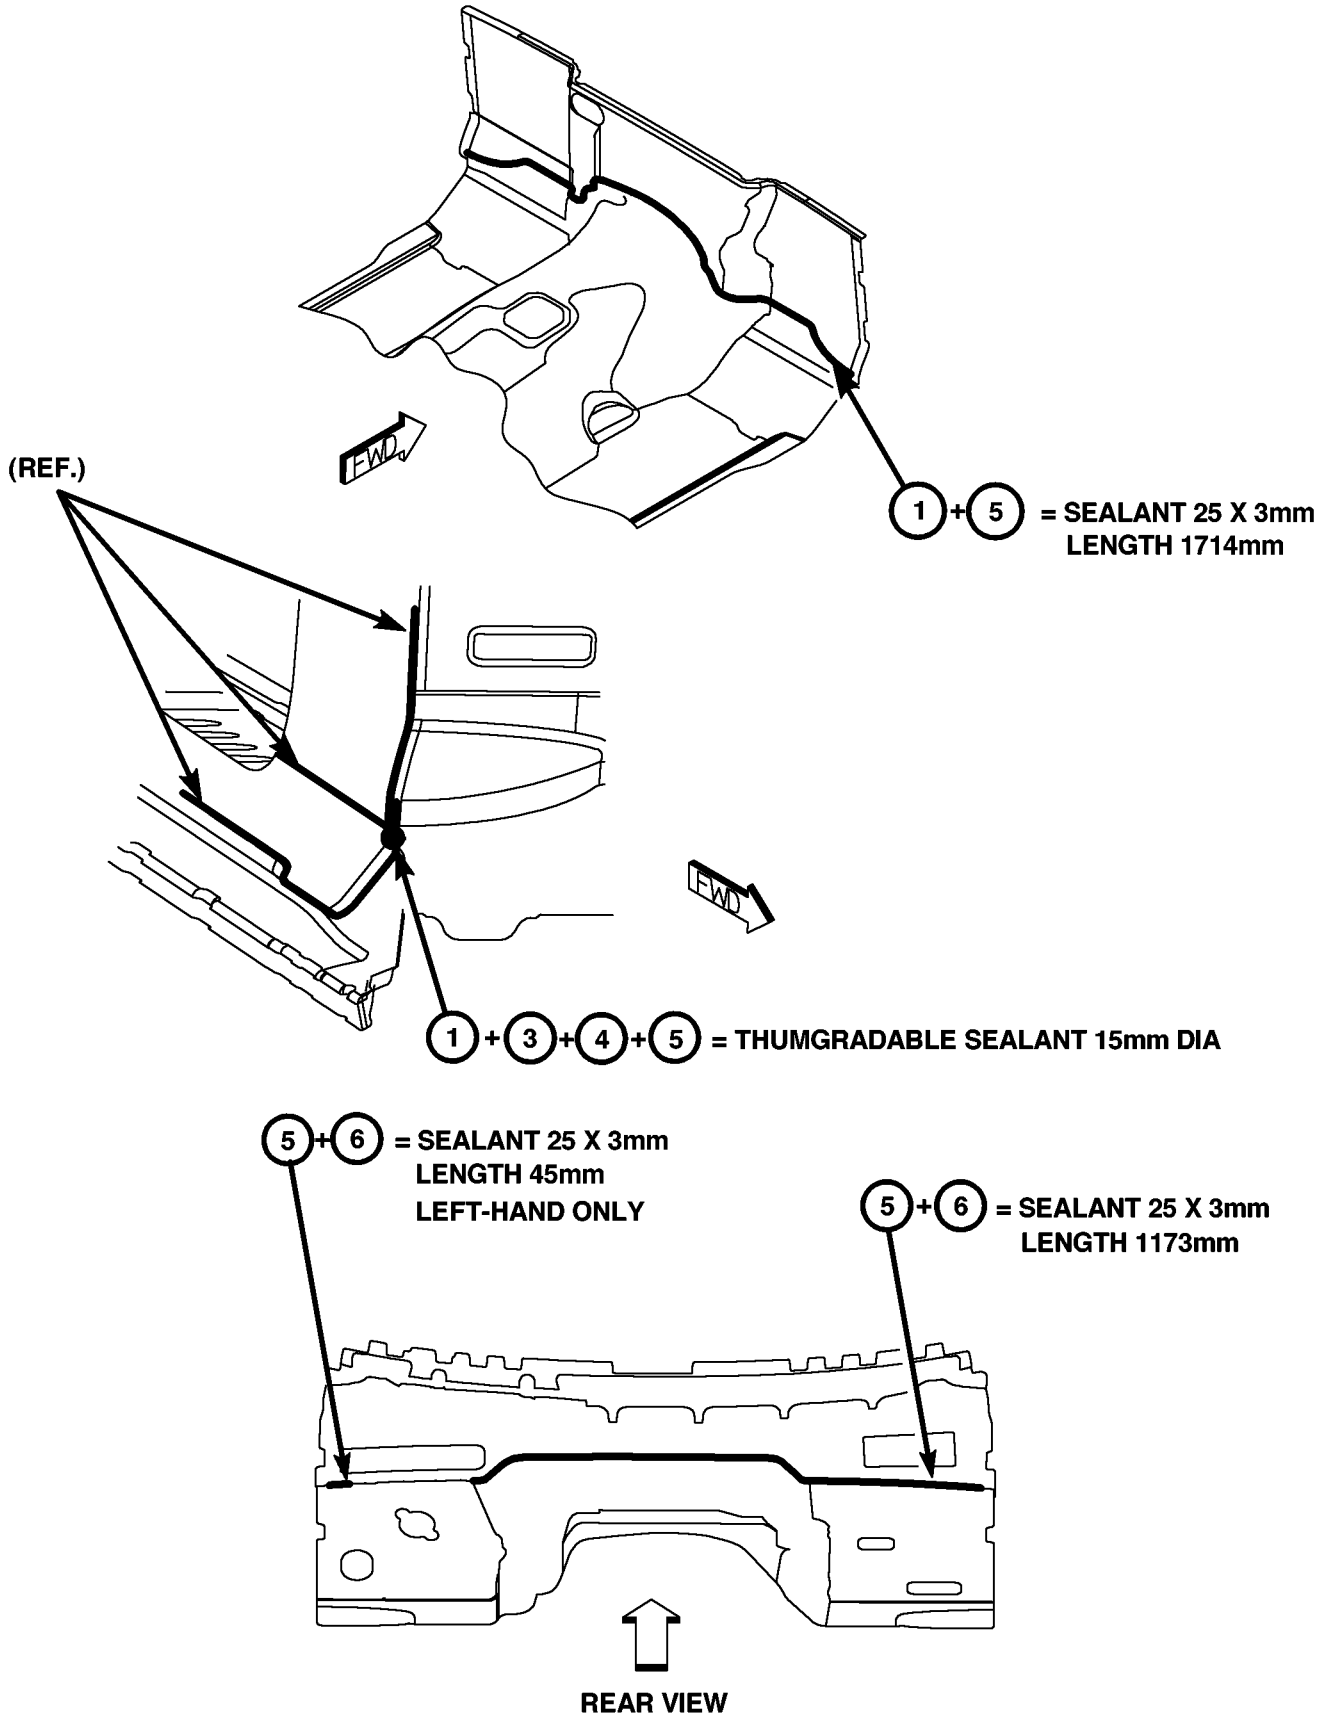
FRONT FLOOR PAN & DASH PANEL
